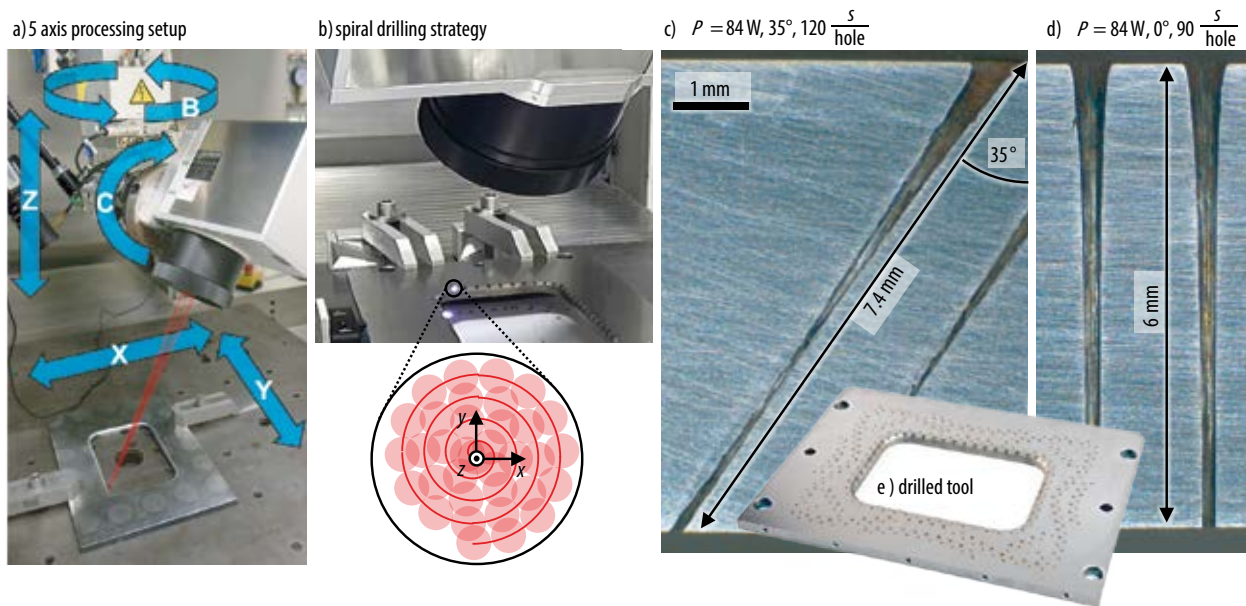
Five-axis processing setup in combination with a galvanometer scanner used for laser drilling of the forming tool (a). Spiral drilling strategy for an adapted hole geometry (b). Cross sections of holes drilled through 6 mm thick hardened steel plates with $P = 84$ W and with a 35° -inclined drilling axis, resulting in 120 s drilling time per hole (c). Vertical drilling axis resulting in 90 s drilling time per hole (d). Dry metal forming tool made from hardened tool steel after deep drilling of 336 holes (e).
